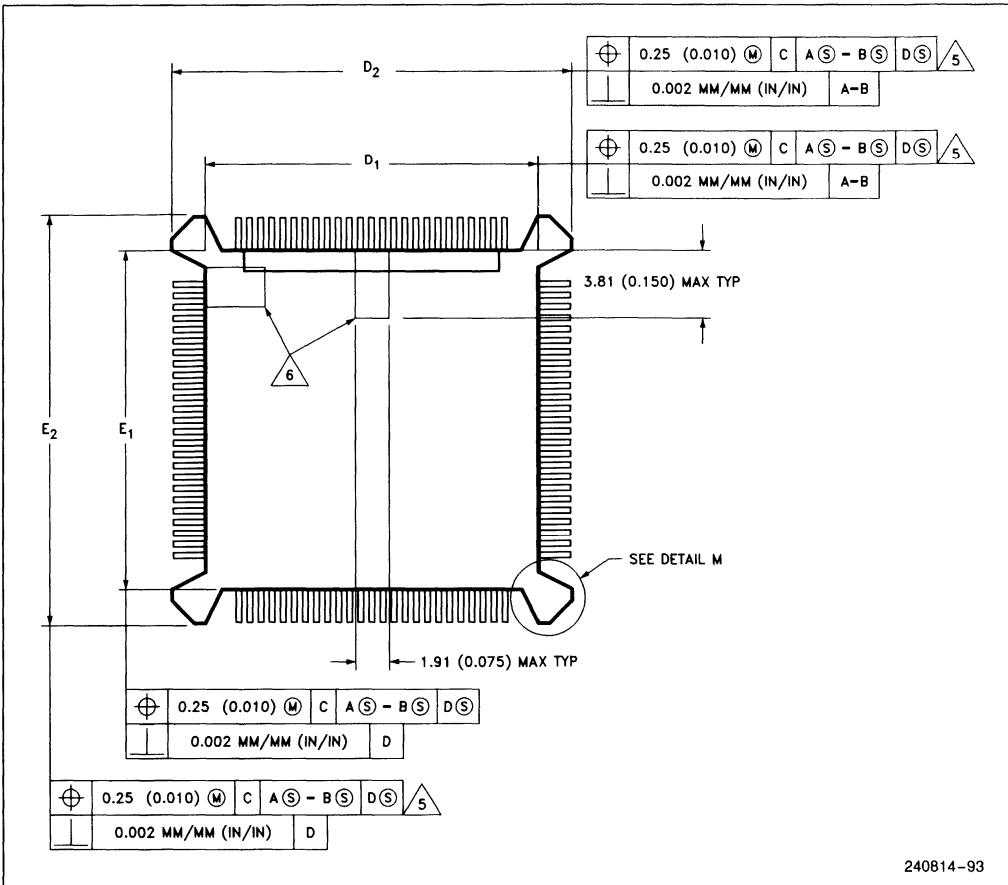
Detailed Dimensions of the 82360SL I/O in the 196-Lead PQFP—Molded Details
